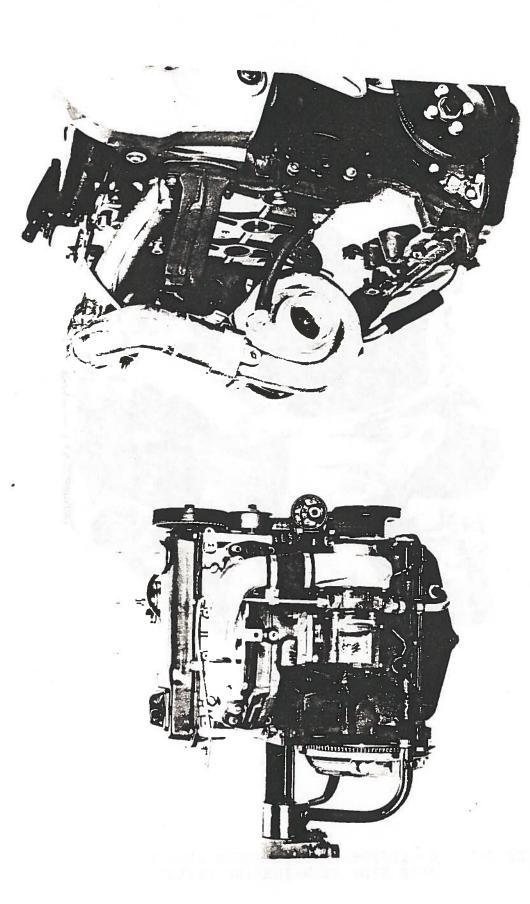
4-CYLINDER TURBOCHARGED ENGINE-SIDE VIEW-INLET MANIFOLD
